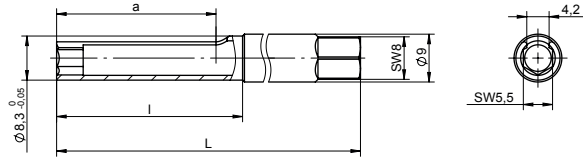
Mounting tool Type 1300B12 (a 40, l 45, L 100)
